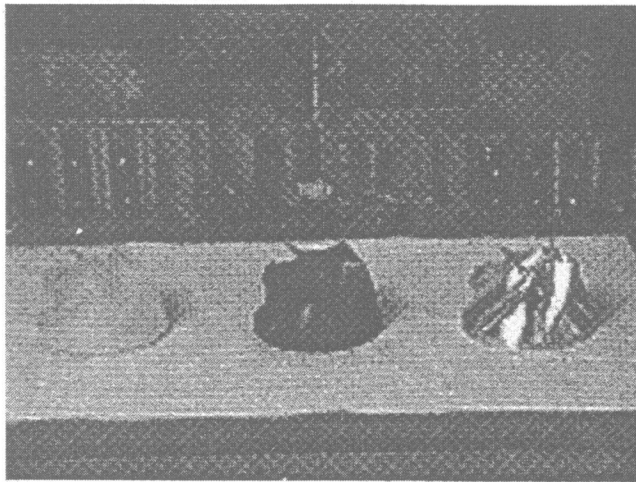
Machined parts: SLA, wax, metal (from left to right)
